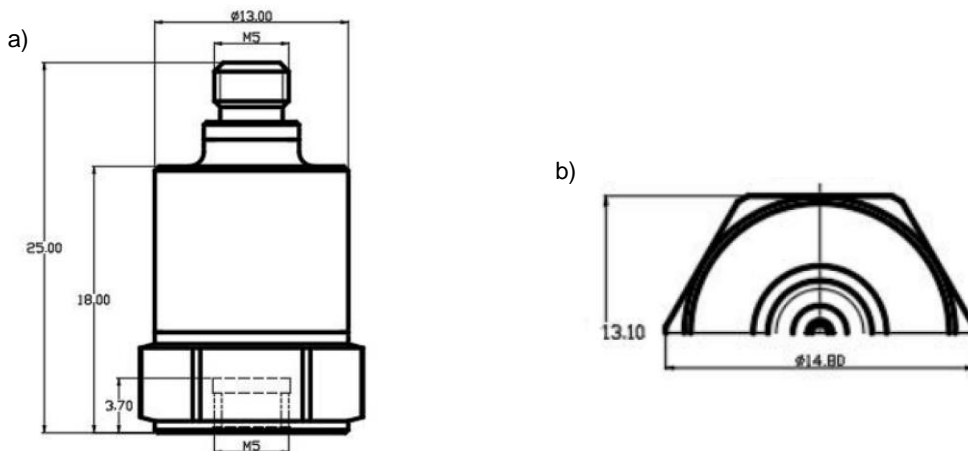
Mechanical Dimension SSA-P9UCB2 a) side view b) top view
